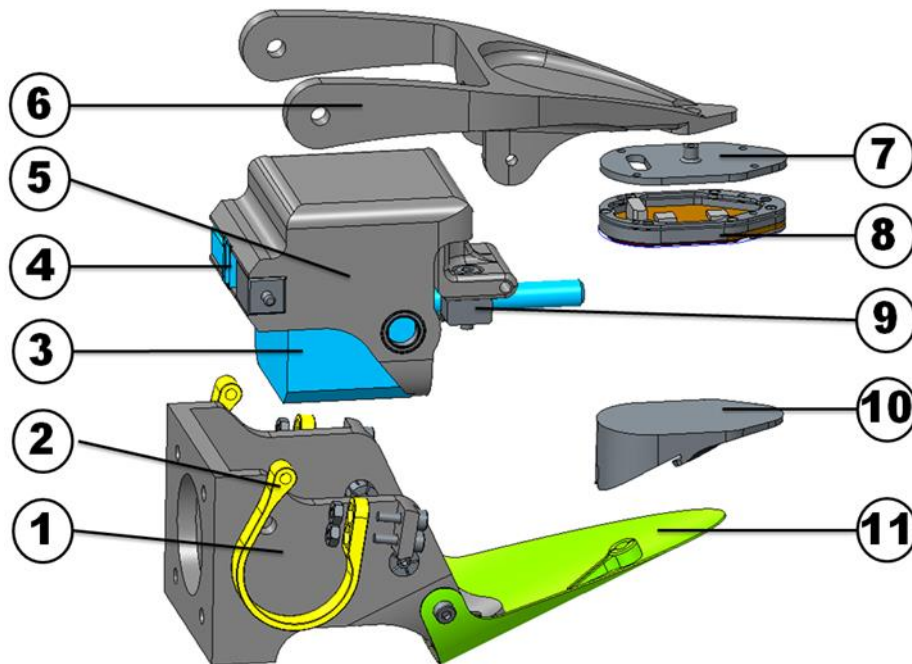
Exploded view of gripper. The numbered components are: 1- main frame; 2- U-shaped spring; 3- stepper motor NEMA17 with lead screw; 4- micro DC motor; 5- tilting motor block with embedded electronics; 6- upper finger; 7- sensor holder with elastic hinge; 8- tactile sensor; 9- slider on the lead screw; 10- lower finger pad; 11 – lower finger.
